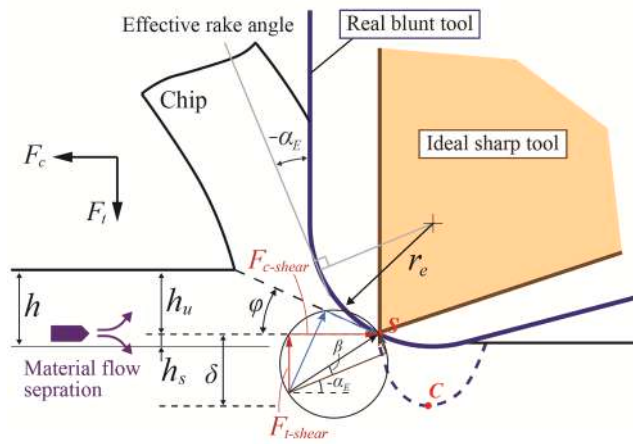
Schematic of tool-workpiece contact in nano cutting.
